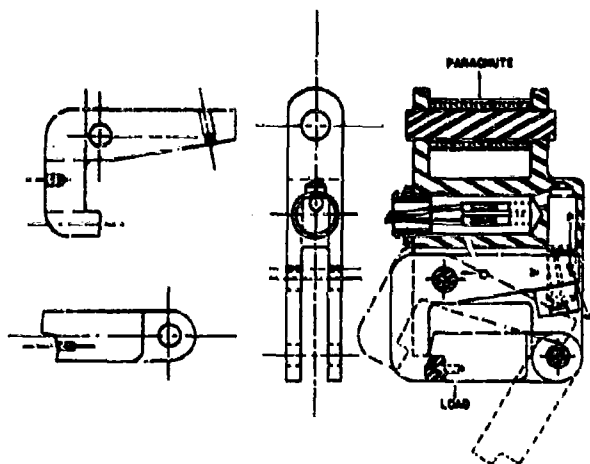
Parachute Canopy Release Assembly - Latch Type
